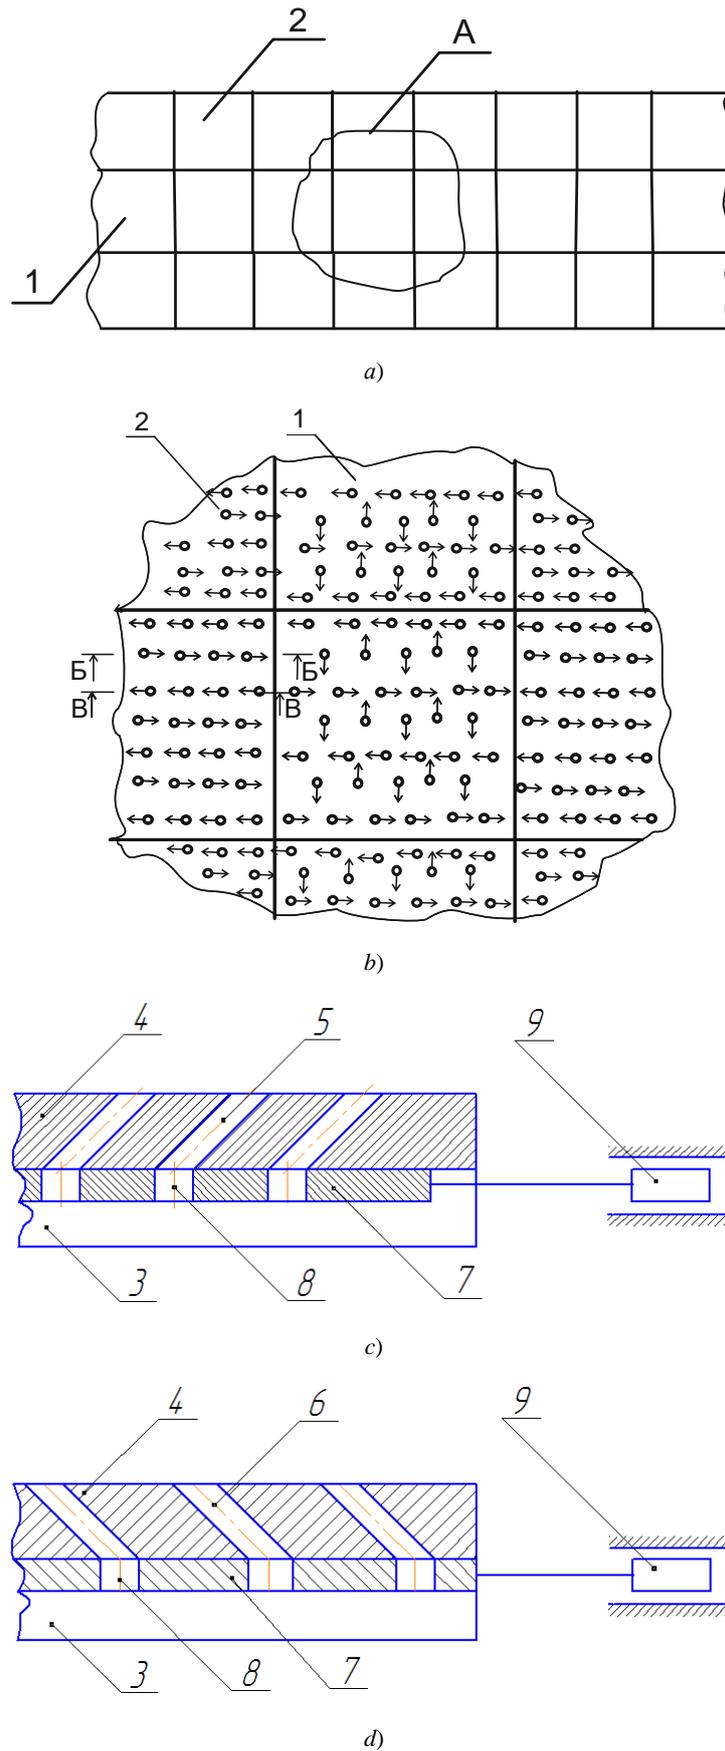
Scheme of mechanization of a rack warehouse using hovercraft transport devices: top view (a), view A (b); section B — B (c); section B — B (d); 1 — transport conveyor; 2 — rack cell; 3 — receiver chamber; 4 — bearing plate; 5, 6, 8 — feed channels; 7 — control plate; 9 — control device
